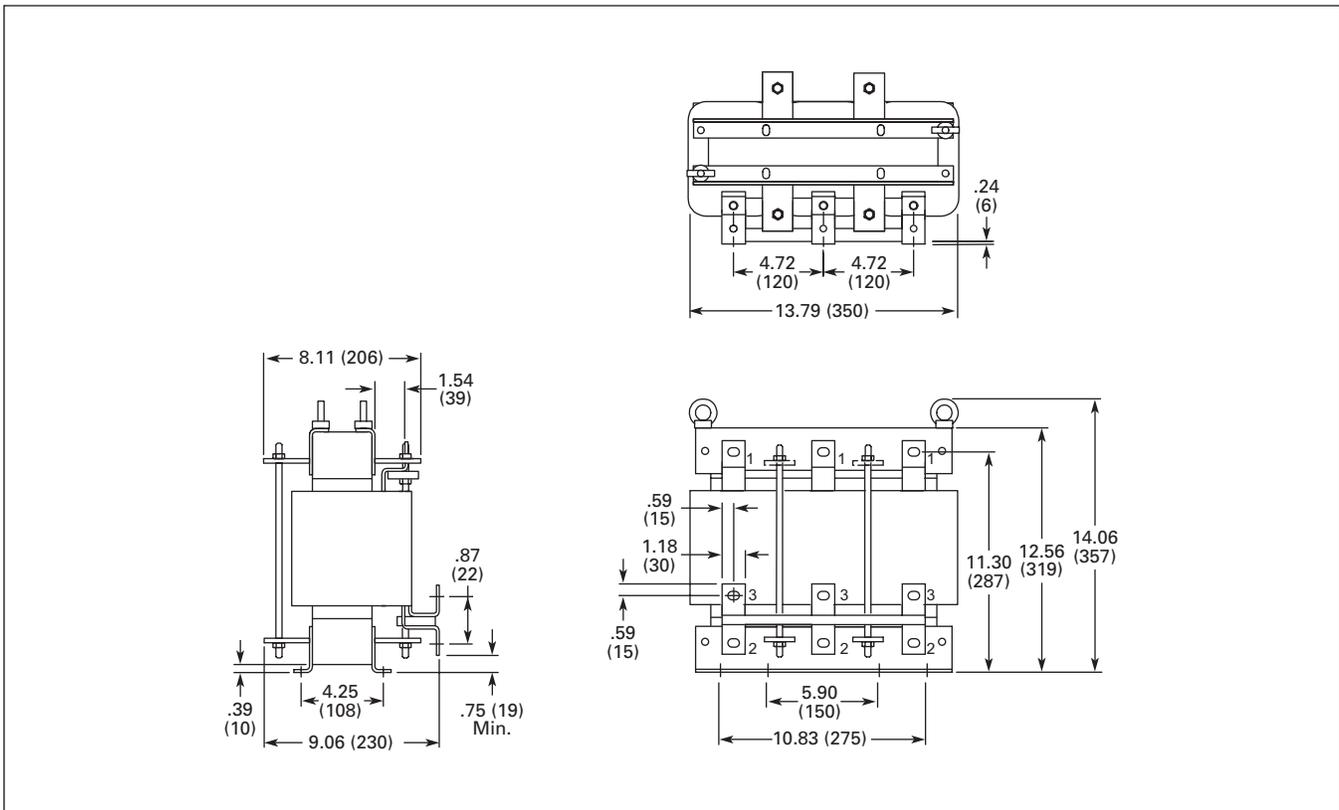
Dimensions of AC Choke CHK0261 in Inches (mm)
